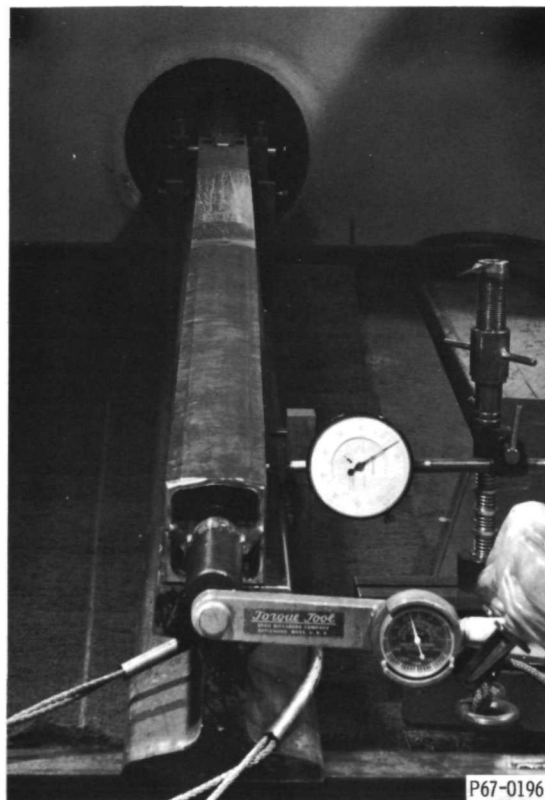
Control rod in alinement jig with bowed beryllium section.
